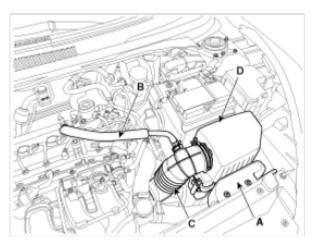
Identifying Air Duct, Breather Hose, Air Intake Hose And Air Cleaner Assembly Courtesy of HYUNDAI MOTOR AMERICA
